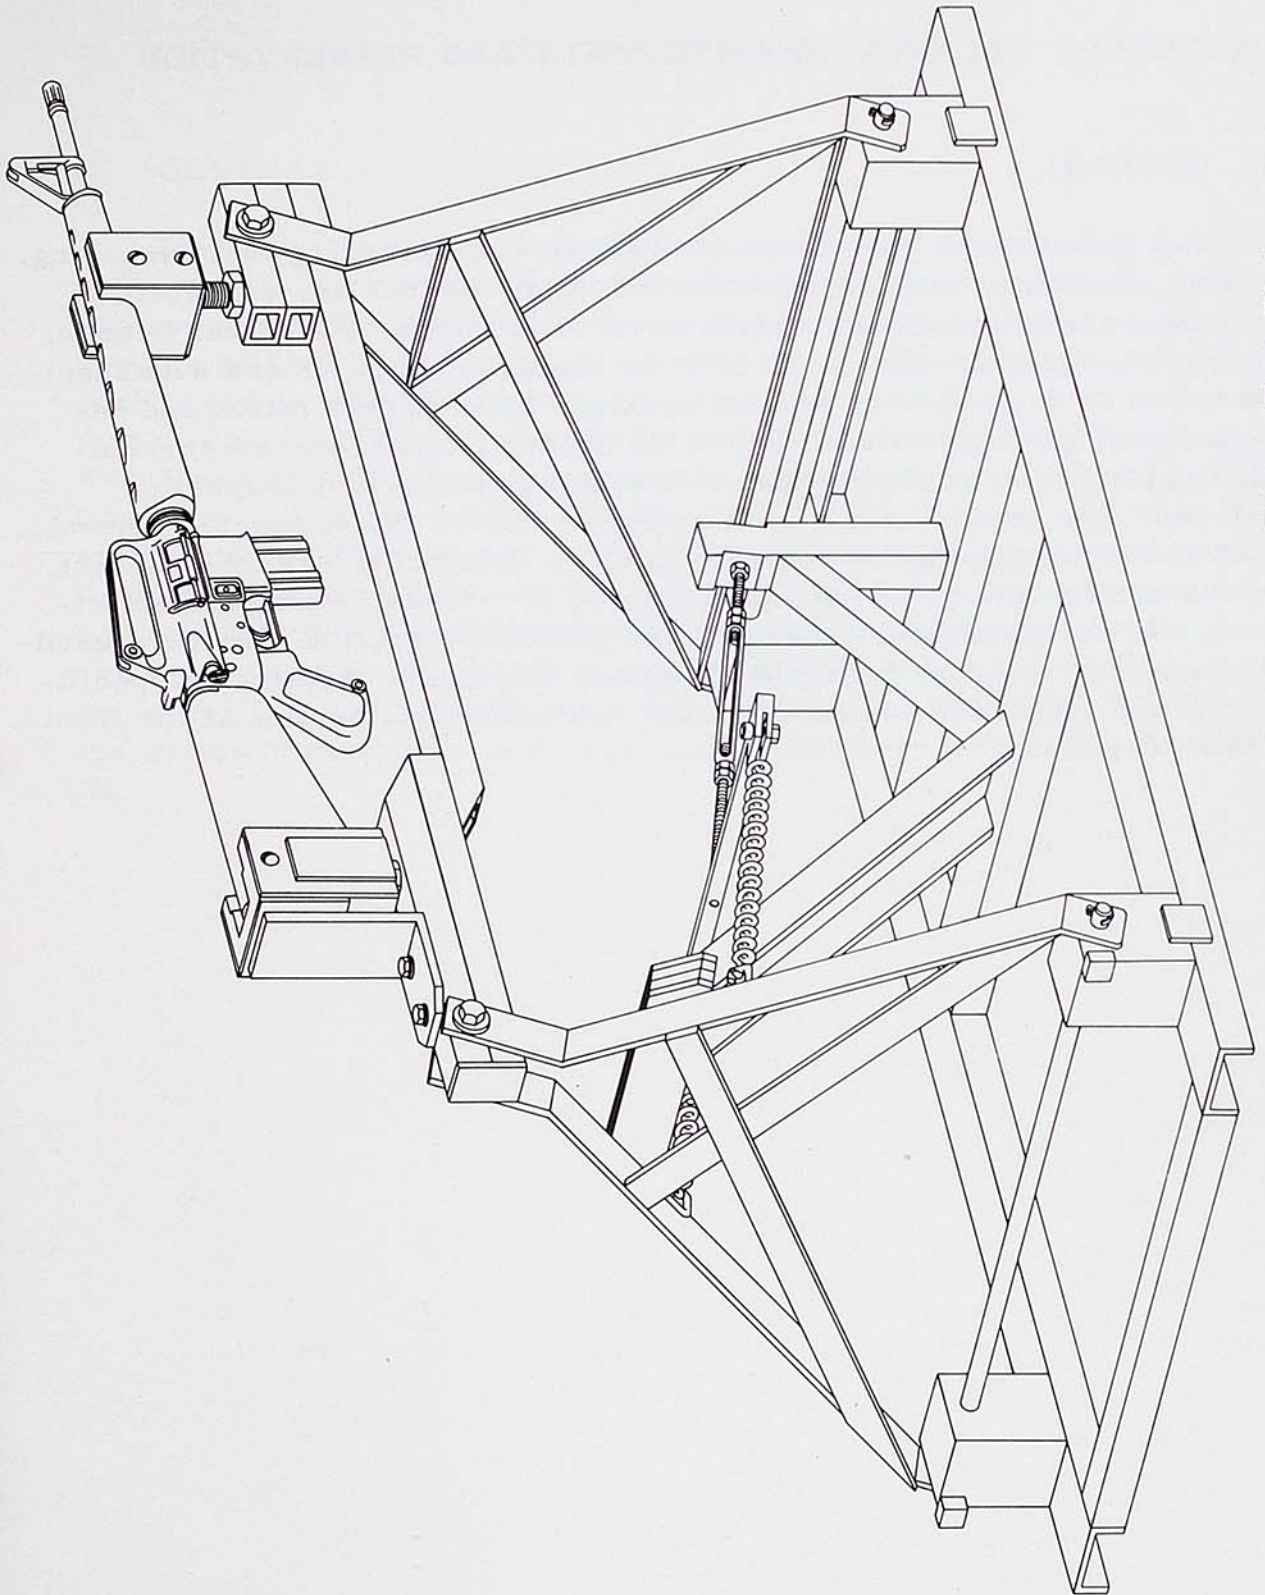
Weapon Positioned in the Function Firing Test Fixture.
